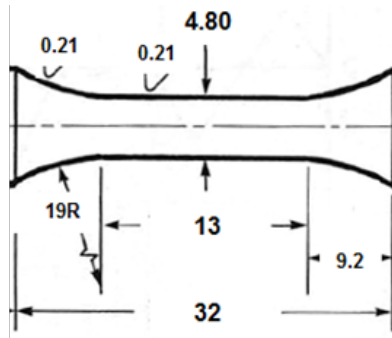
Fatigue test specimen gage configuration, with dimensions in mm.
